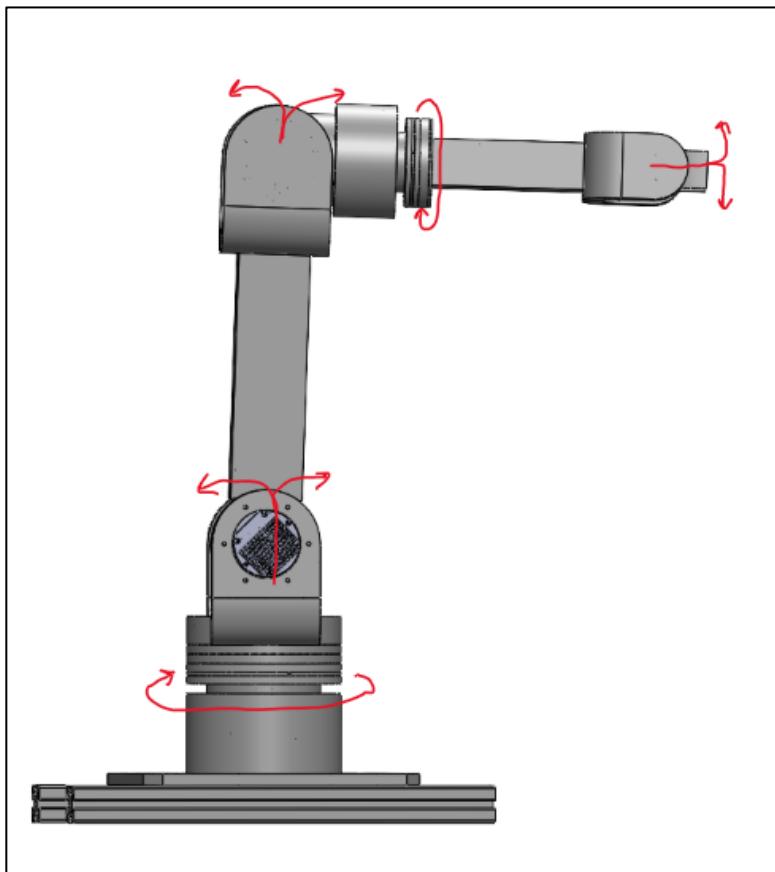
Side View Detailed SolidWorks CAD assembly of structure and joints
